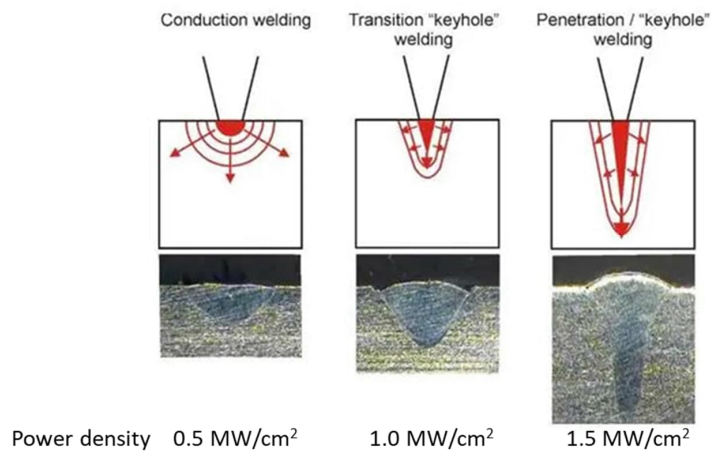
Principle of conduction, transition and keyhole laser welding (modified from the reference <https://amadaweldtech.com/blog/laser-welding-modes-conduction-transition-keyhole-welding/>).
